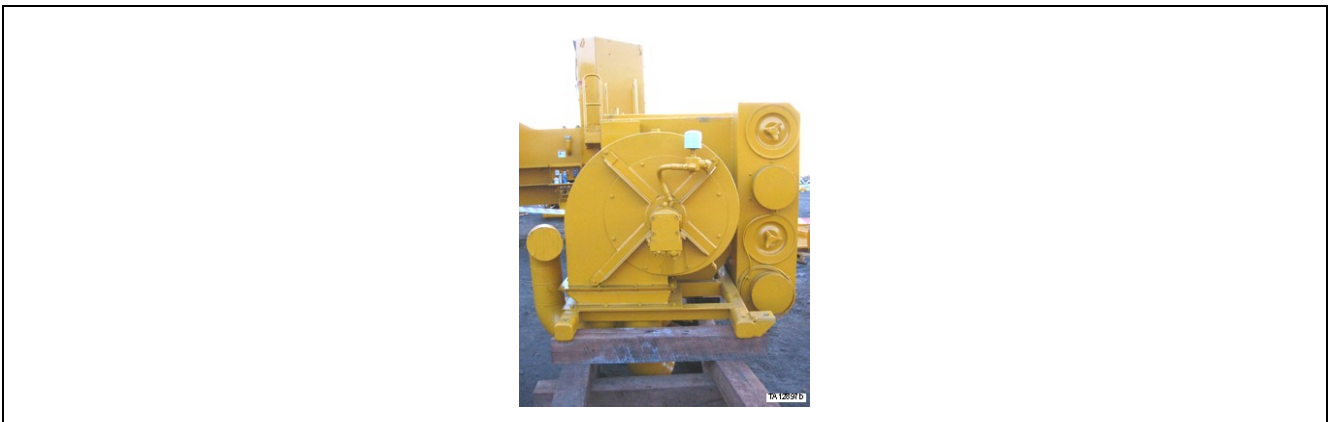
KLENZ™ and blower assembly supported by cribbing - 2 of 3
